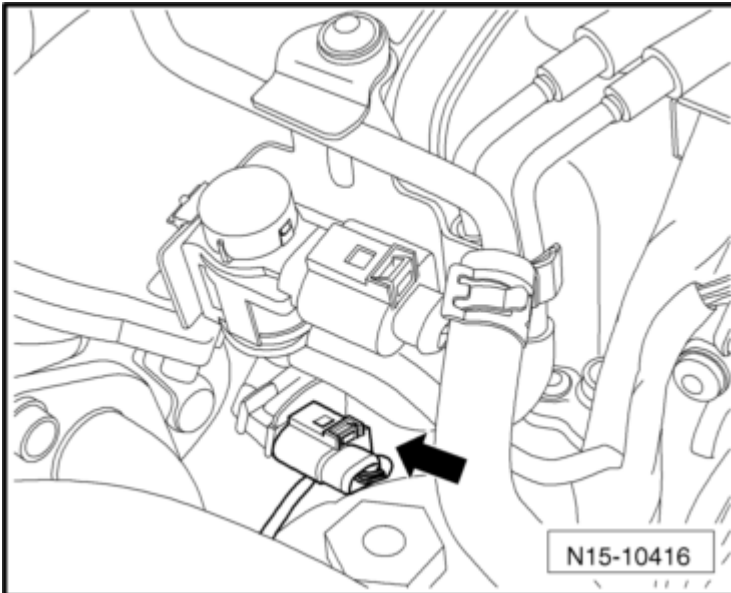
Identifying Camshaft Position Sensor -G40- Connector -Arrow-
